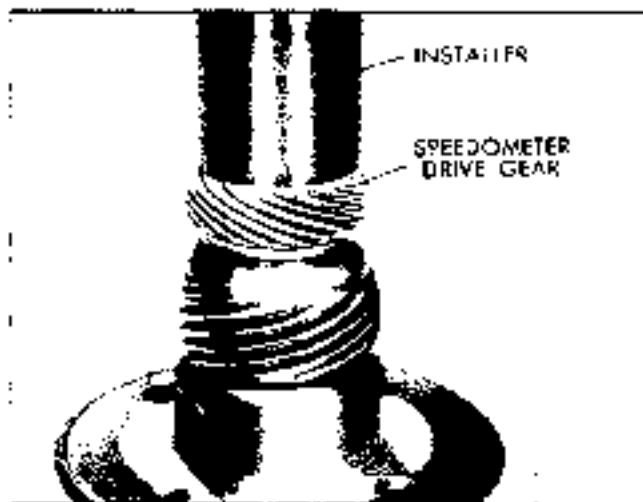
E-54—Instl Prg Speedometer Drive Gear
